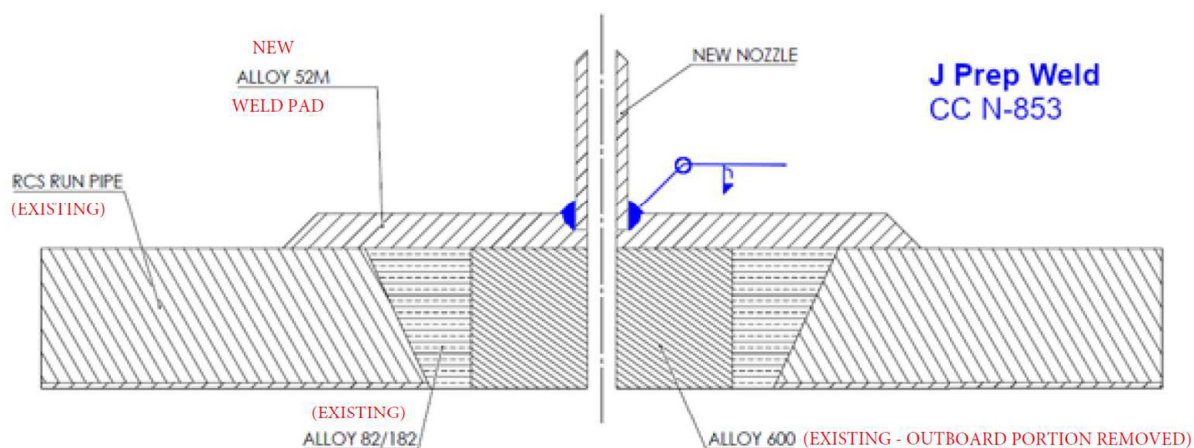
Sketch of Example Repaired Nozzle Configuration with Code Case N-853 J-Groove Weld
